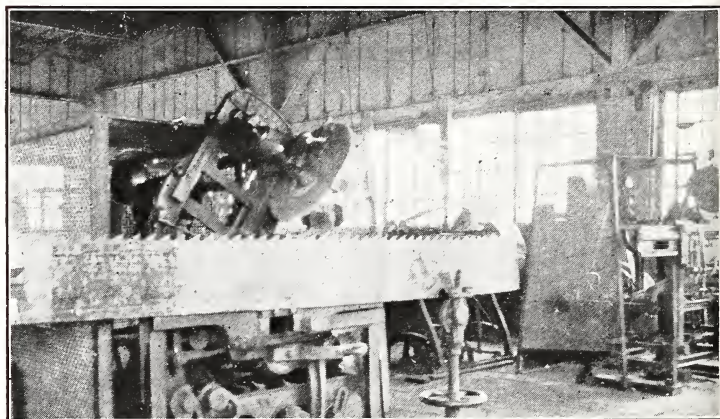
Guards for band saw grinder; front view. (Rule 268.)
